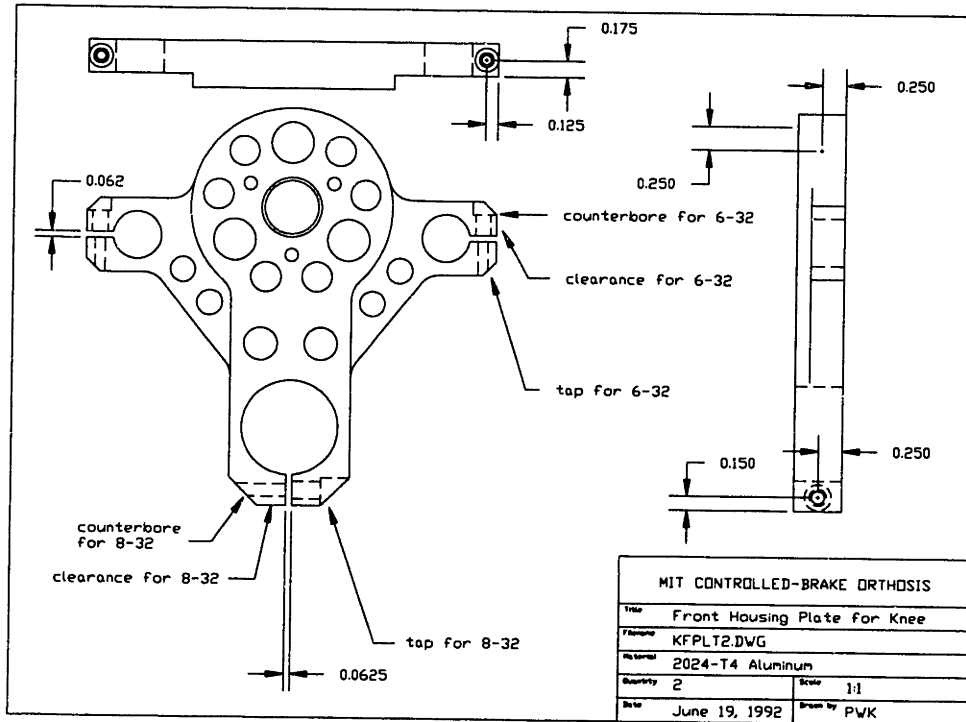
Front plate for knee gear housing (drawing 2 of 2).
